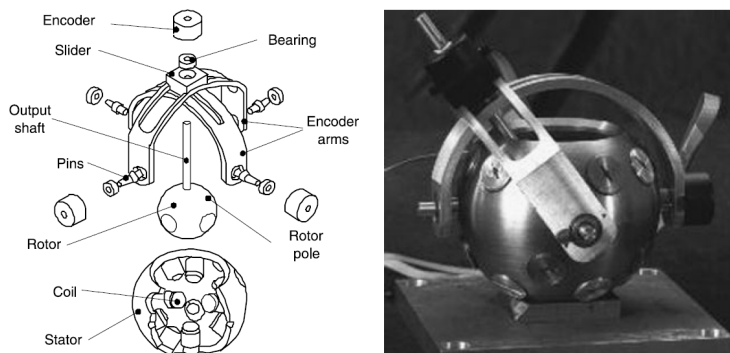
Variable reluctance spherical motor proposed by Lee et al. [41–45]. (Left) Exploded view. (Right) Prototype. Drawing taken from [24].
